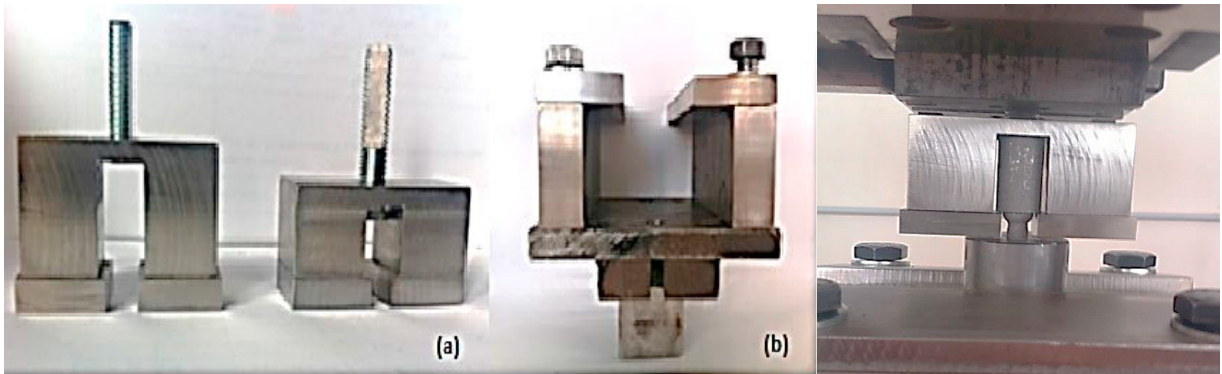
(a) Gripping mechanism for the screws; (b) Gripping mechanism for the test block. Fig. 3 Specimen mounted on the testing machine.
